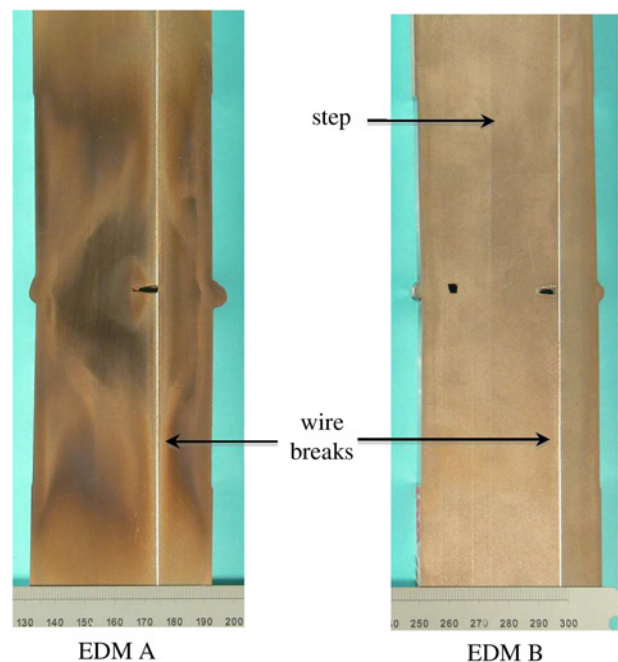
Cut surfaces of the 240 mm long × 60 mm deep electron beam welded test components showing weld blow holes and evidence of wire breakages and steps
